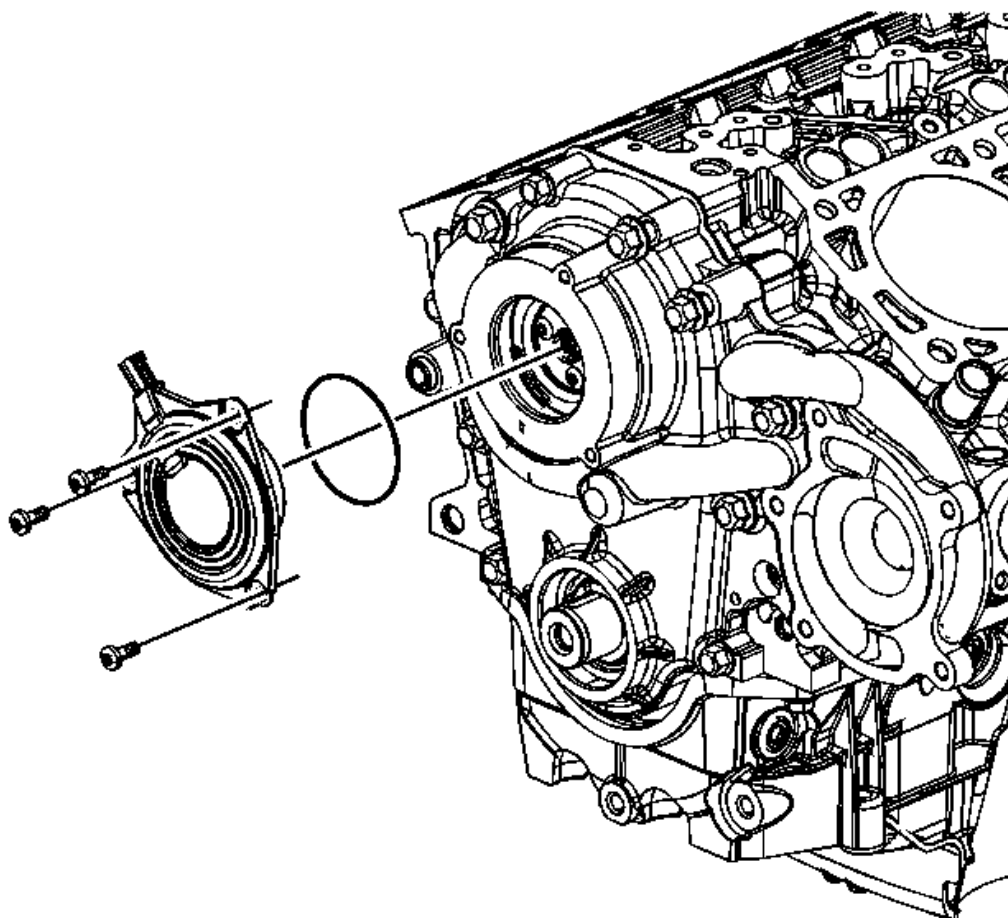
Camshaft Position Actuator Magnet, Bolts & O-Ring Seal
